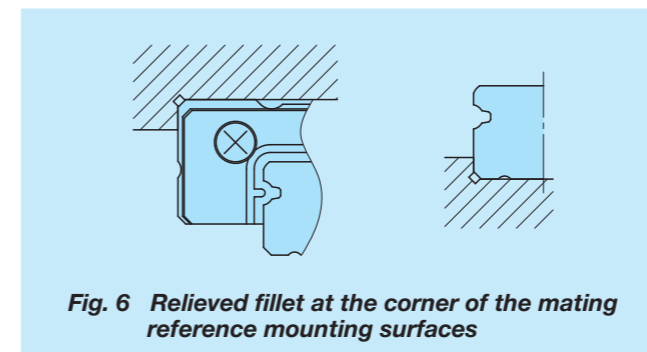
Relieved fillet at the corner of the mating reference mounting surfaces
